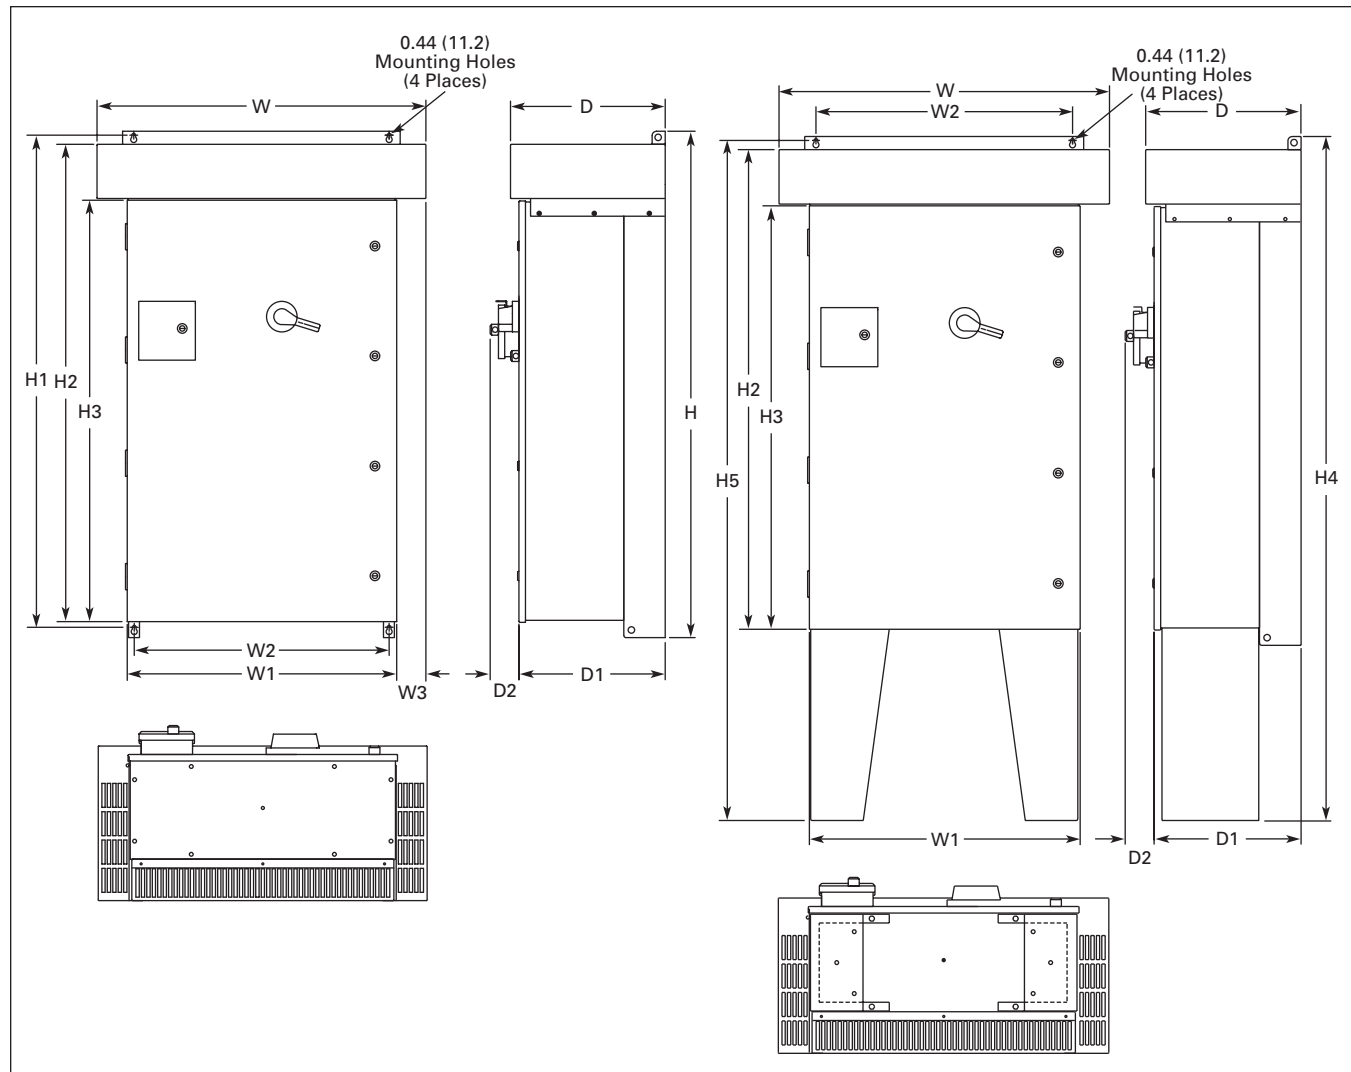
Enclosure Size C—UL Type 3R—Approximate Dimensions in Inches (mm)
